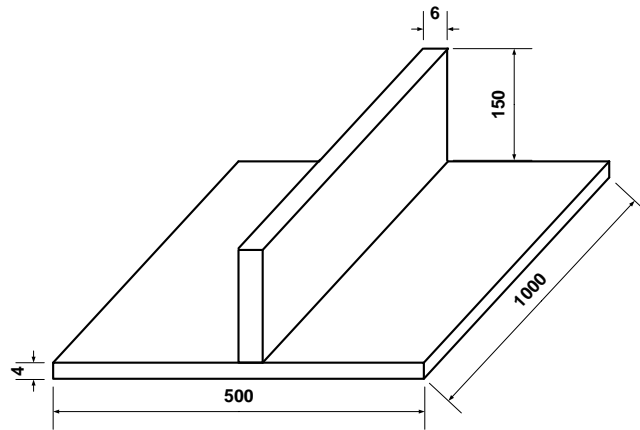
Fillet weld panel geometry used in the TTC fillet weld application
